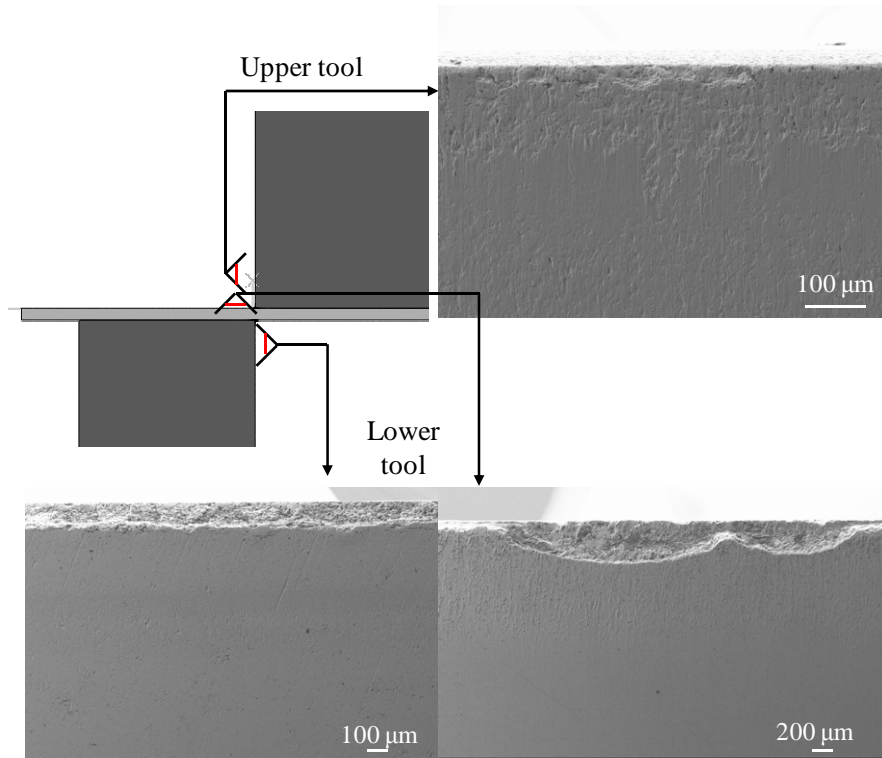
Fractographic inspection of the 12379 upper and lower slitting tools
